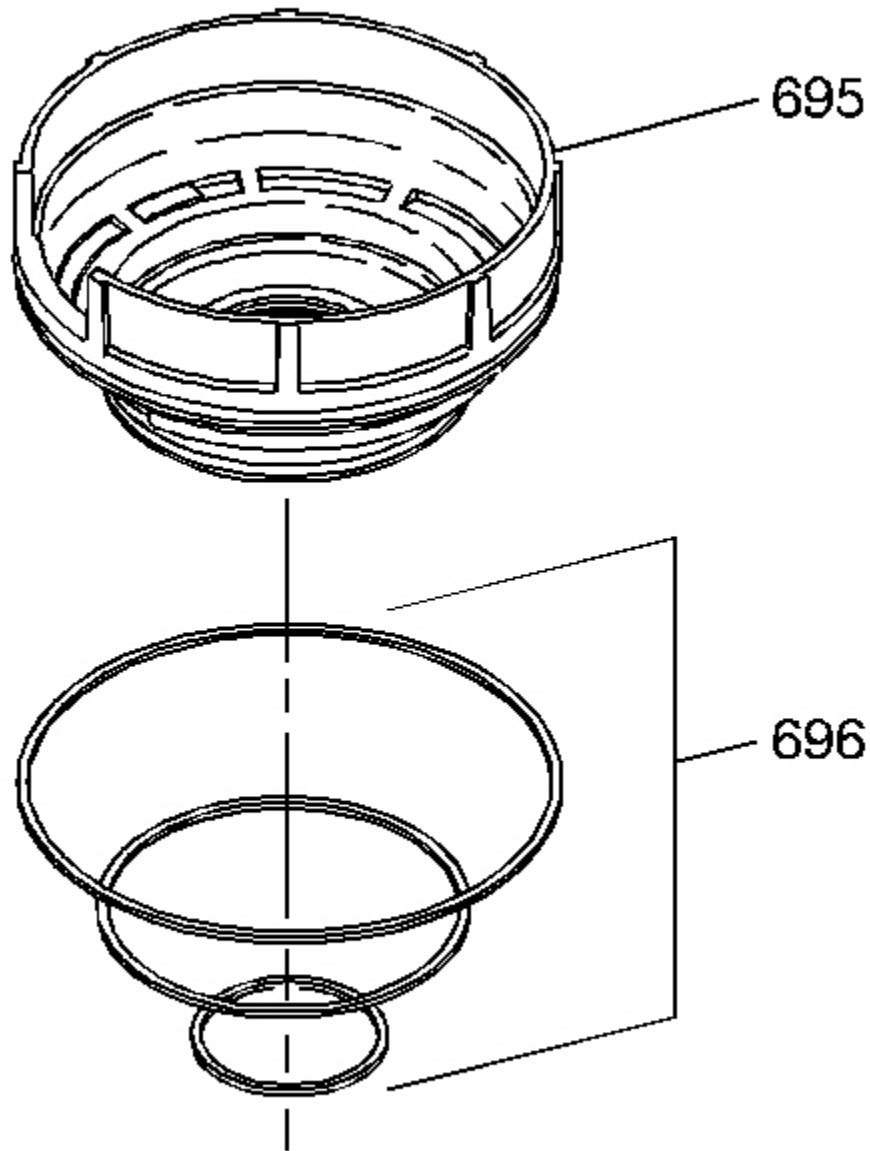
Installing Transmission Seals Onto Low And Reverse Clutch Piston
